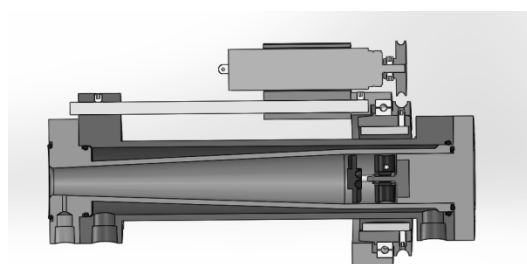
Cross-section view of prototype fan target. Beam enters from left with fan assembly at the back of the target. The fan assembly can be removed for inspection or modification.
